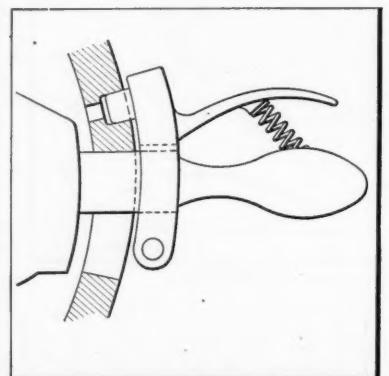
Withdrawing and Locking Device on Change-gear Box
